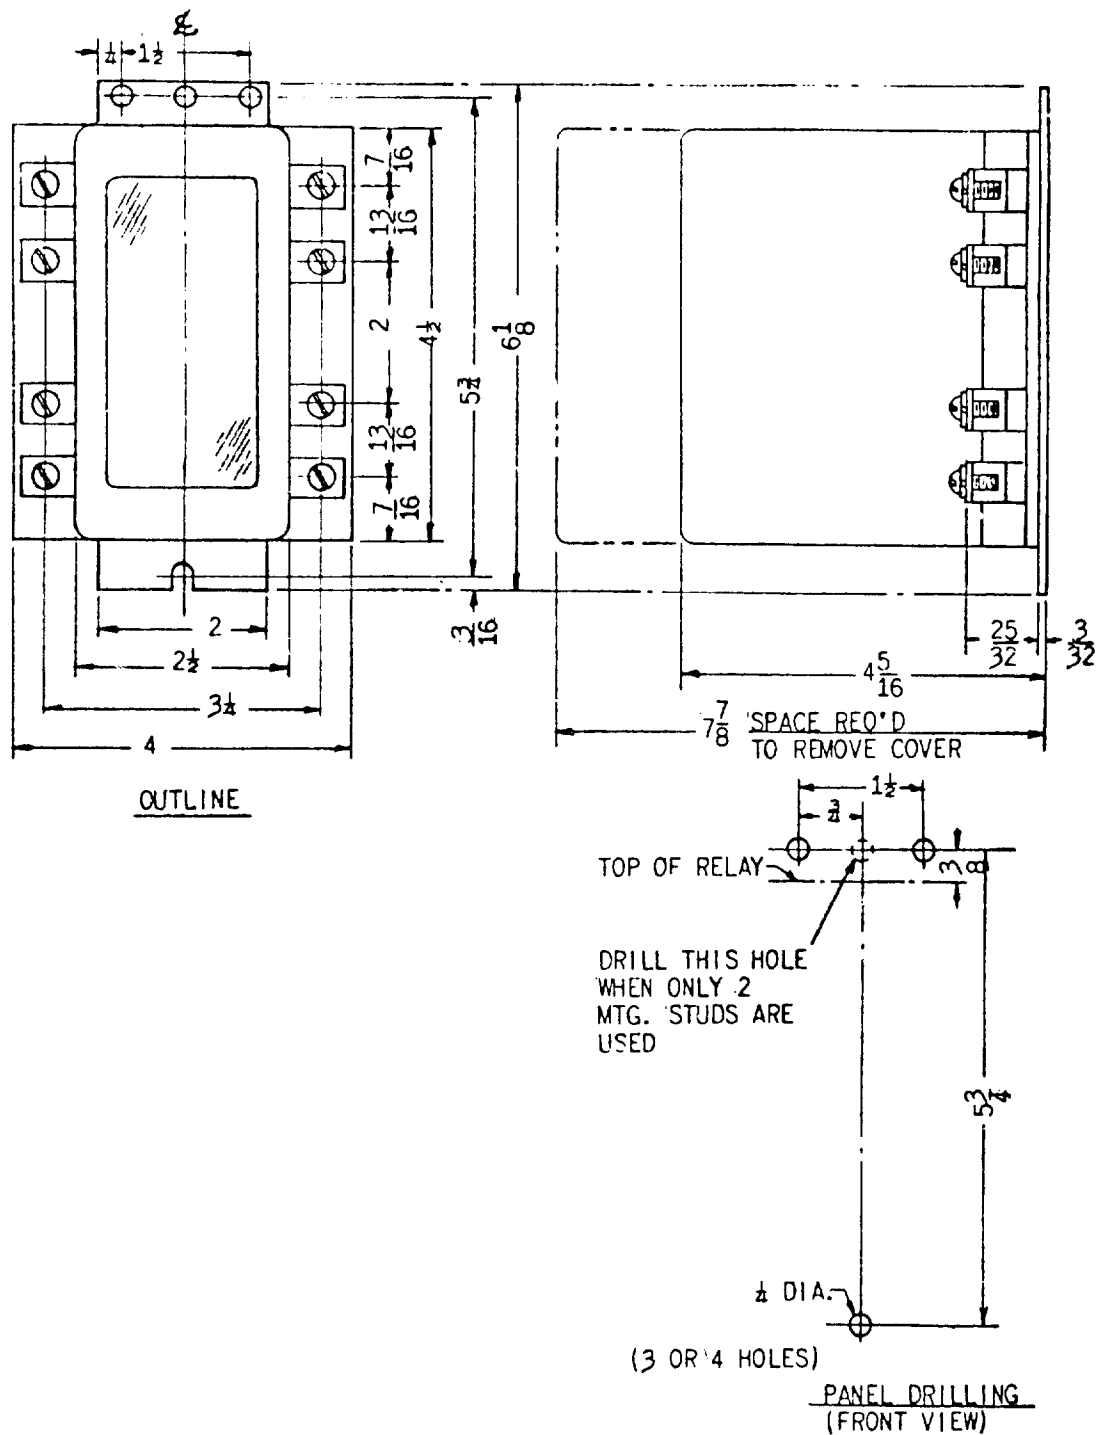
(0208A3643) Outline and Panel Dimensions for the Front Connected NGA15A with Glass Front Cover
